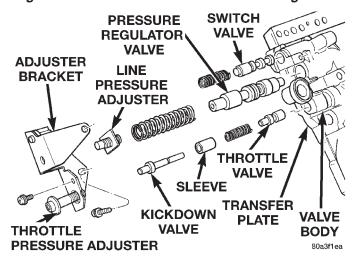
Adjusting Screw Bracket, Springs, and Valves
